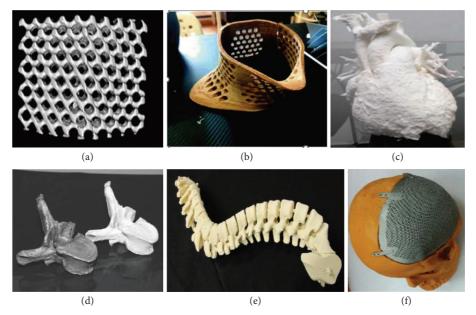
Illustration of (a) 3D scaffold printed by SLA, (b) the neck orthosis printed by FDM, (c) 3D print of heart with blood vessels prototypes by SLS, (d) 3D prosthesis part printed by DLP, (e) 3D-printed scoliosis backbone by the binder jetting (BJ) method, and (f) cranial implant printed part by EBM [51].
